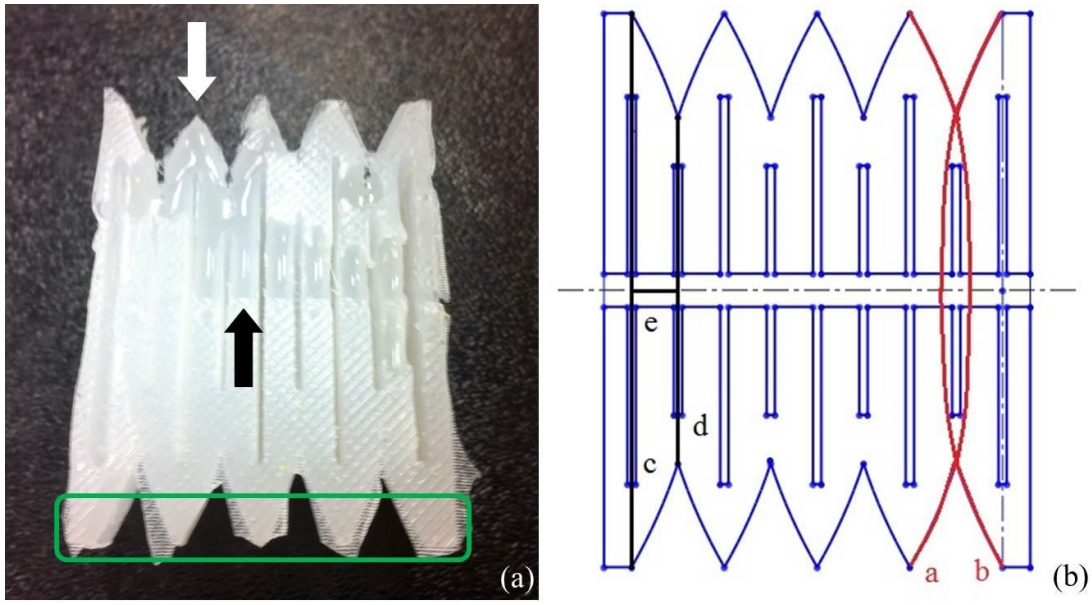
A Half of Extension Mechanism V1 Created by the Mold V1d, (a) Real Piece; (b) 2D Sketch
